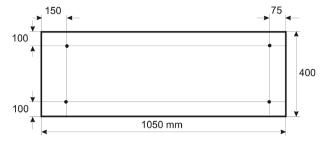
Dimensions of the one of four segments building the protective wall at the orientation tests stand.
